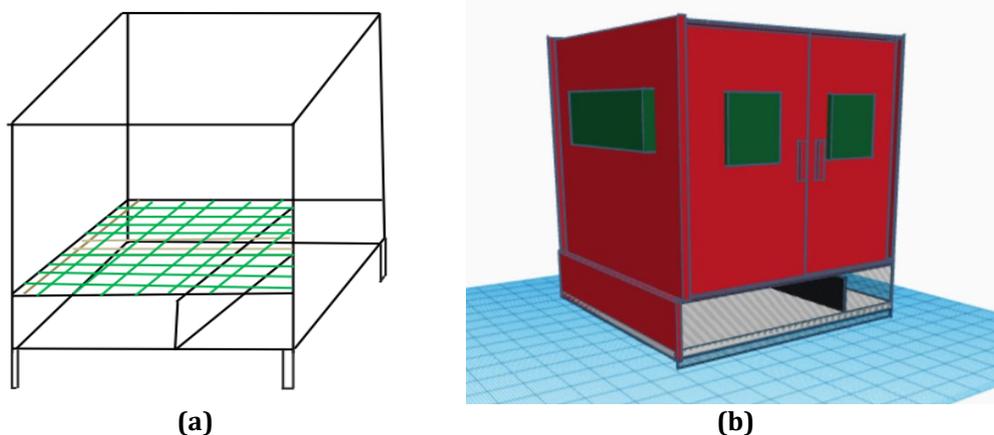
Chicken coop prototype design (a) cross section; (b) 3D model
